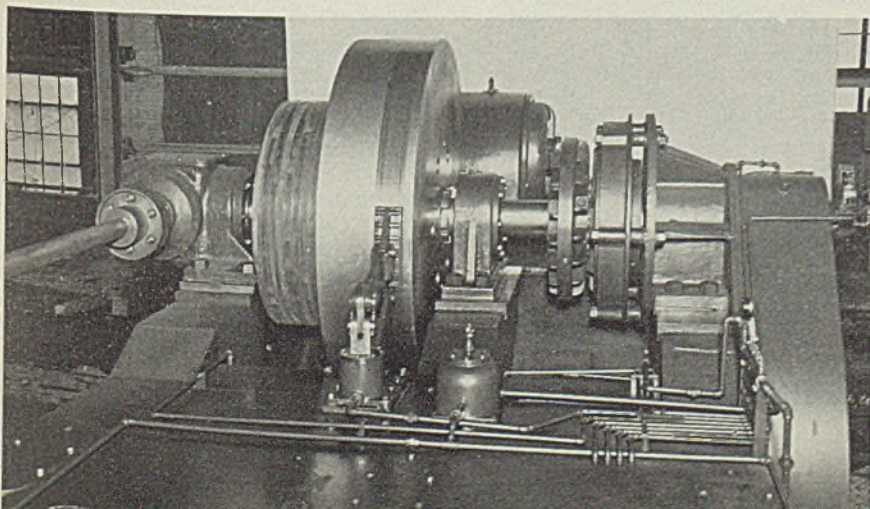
Drive unit—motor, flywheel, clutch and brake—located on top of machine
